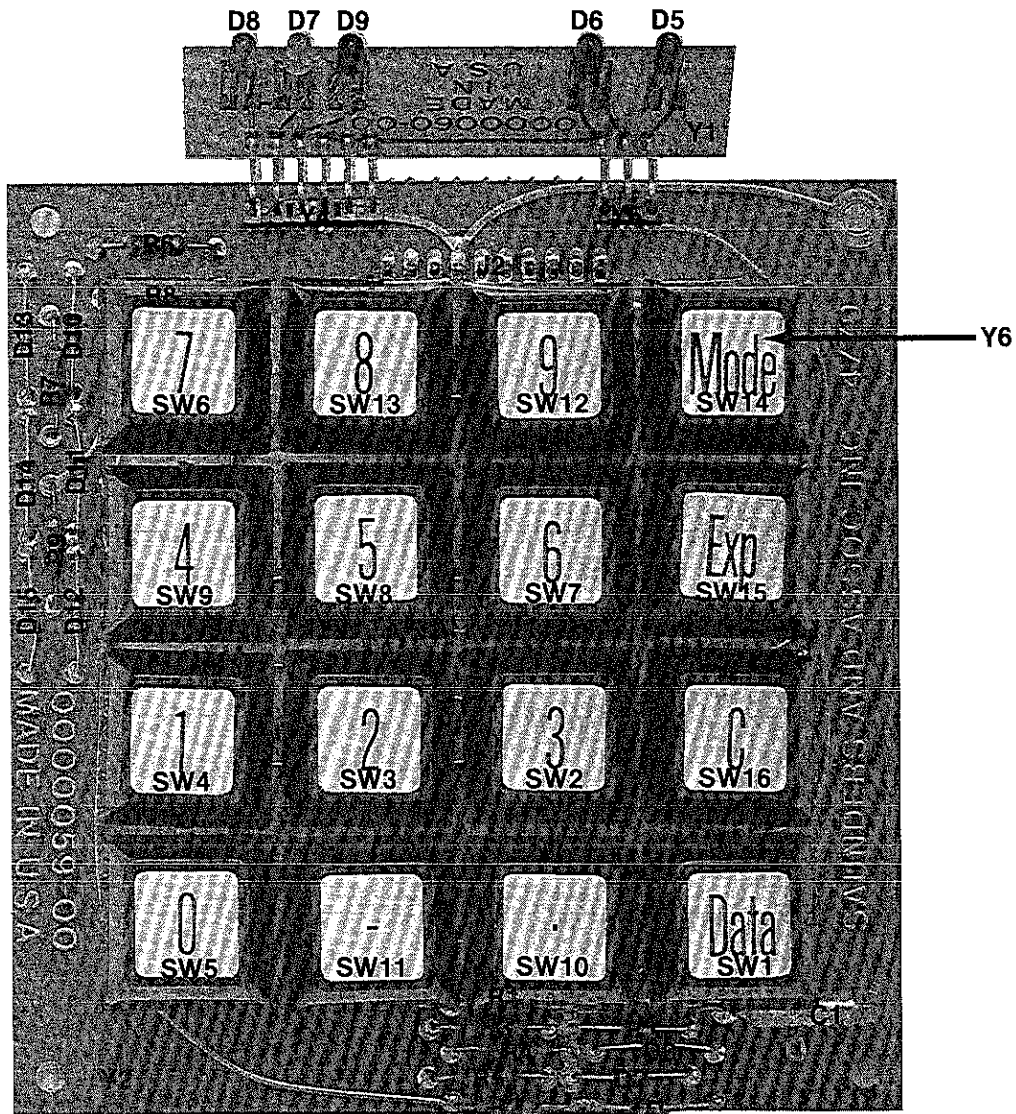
KEYPAD PRINTED CIRCUIT BOARD ASSEMBLY
